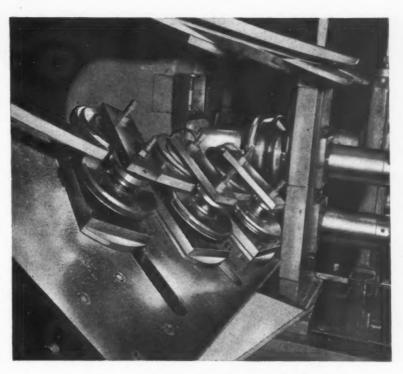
View of the Attachment at the Discharge End of the Rolling Machine which Completes the Rolling of a Flange on the Shape, and Also the Bending of the Shape into Rings of Large Diameter
